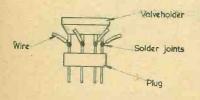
A valve adaptor which enables voltage readings to be taken on the component side of printed circuit boards
